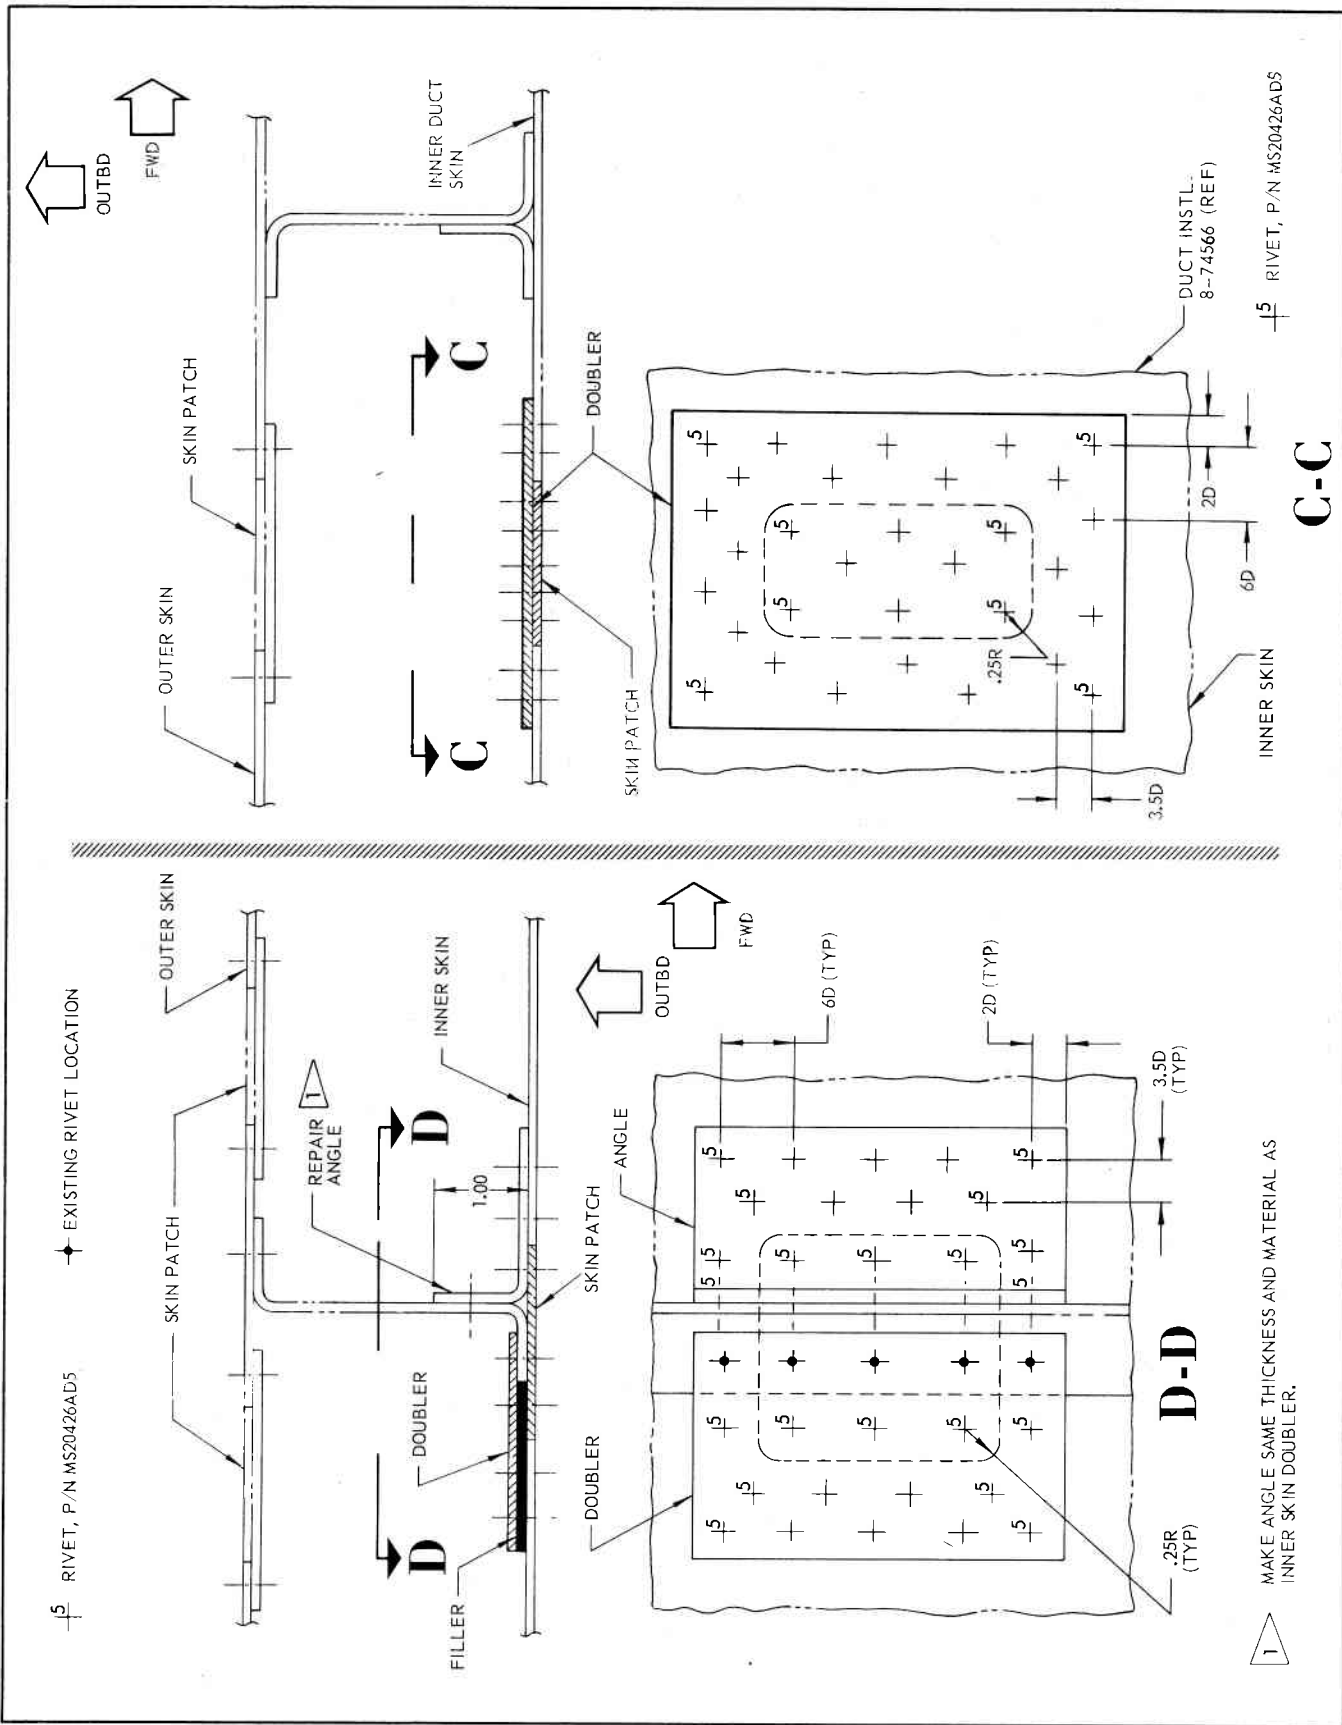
A. Intake Duct Inner Skin - Typical Repair (Sheet 2 of 2)
